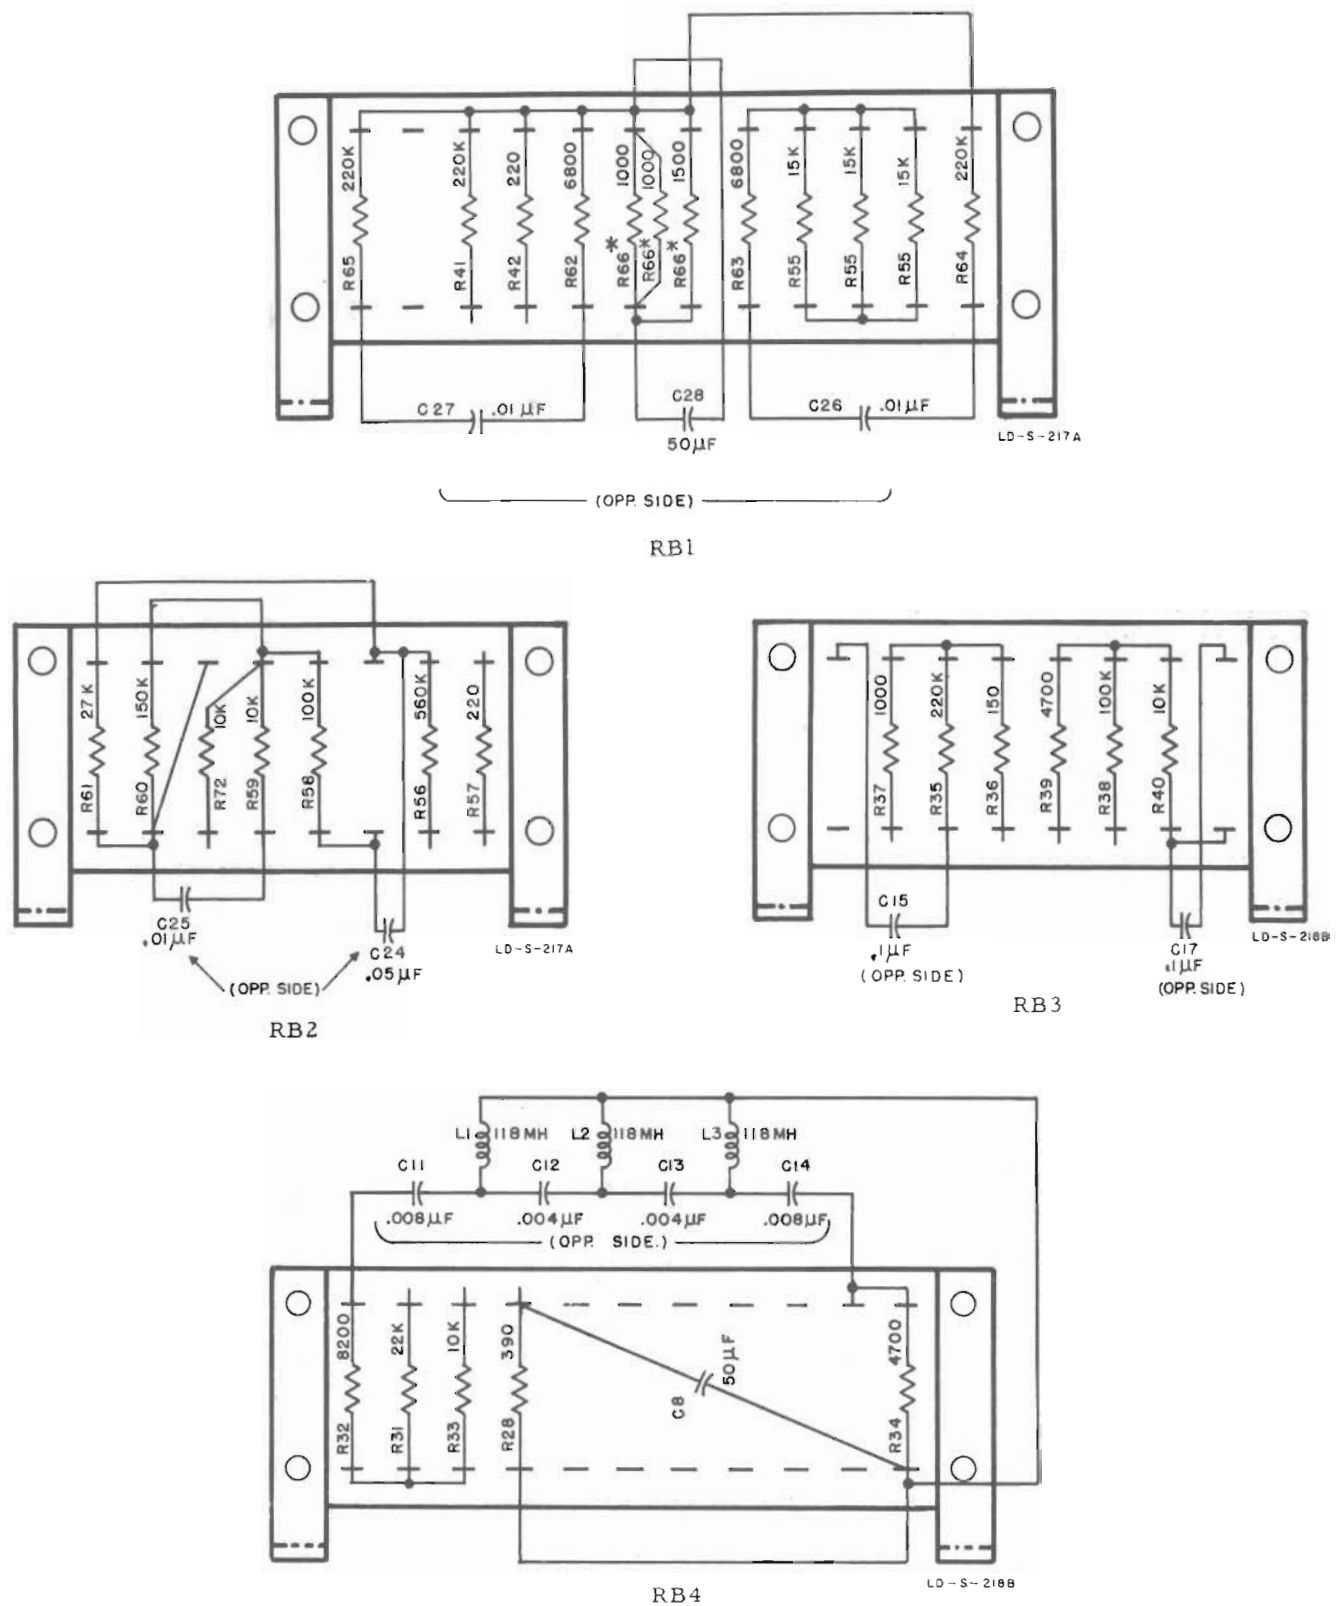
Model 233A Resistor Board Details (Sheet 1 of 2)
